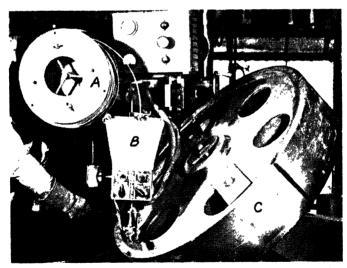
A submerged arc in action: A. Electrode reel, B. Flux hopper, C. The large wheel being fabricated is mounted on a positioner (Courtesy of: Lincoln Electric Company)
